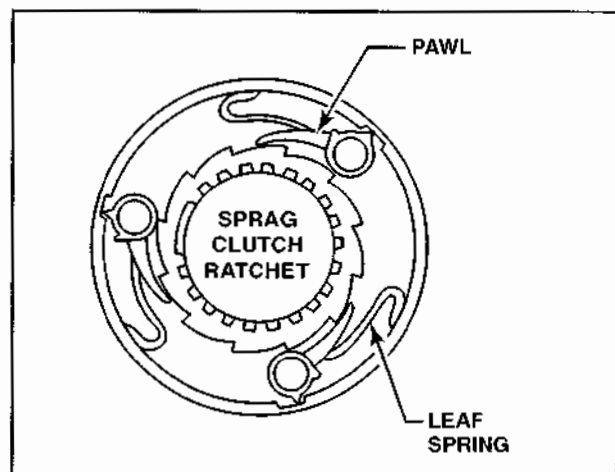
In a sprag clutch assembly used with pneumatic starters, leaf springs force pawls inward to engage the clutch ratchet. When the engine starts and accelerates beyond the starter's speed, centrifugal force pulls the pawls away from the clutch ratchet.
